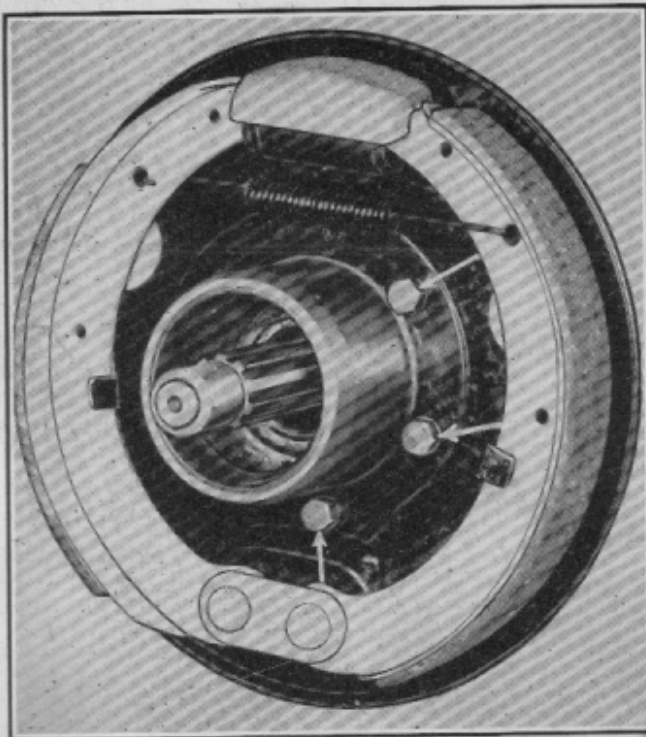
Brake Backing Plate and Shoe Assembly Removal
